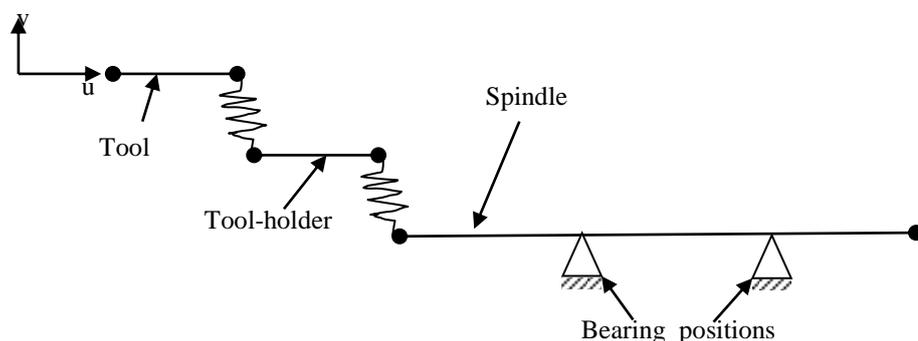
Line model of the spindle-tool unit with spring and bearing connections
